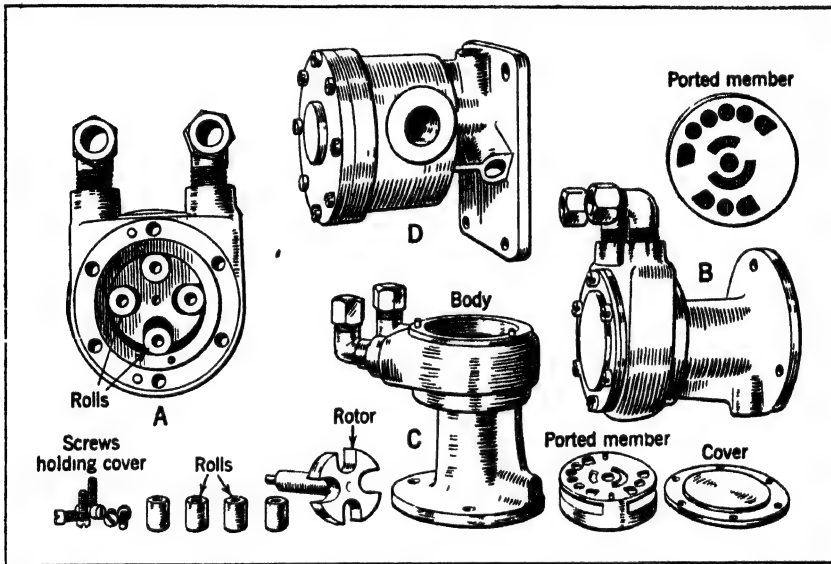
The Barlow Fuel Pump Incorporates a Novel Roller Principle. A—Front View of Automobile Type Pump. B—Side View of Automobile Type Pump. C—Parts of Pump. D—Aircraft Fuel Pump.
